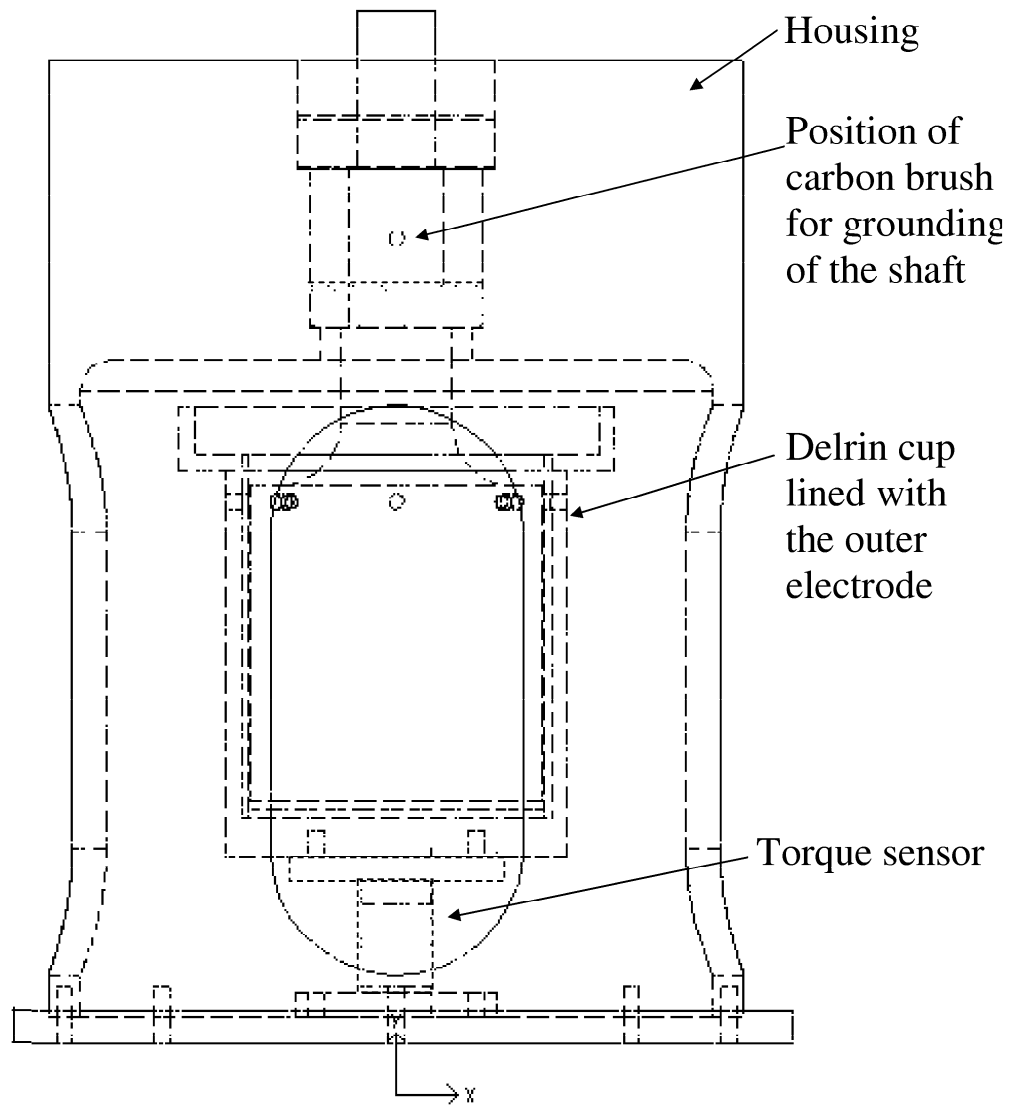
Assembly drawing of the inner electrode, the outer electrode, the delrin cup and the torque sensor in the brake housing.
